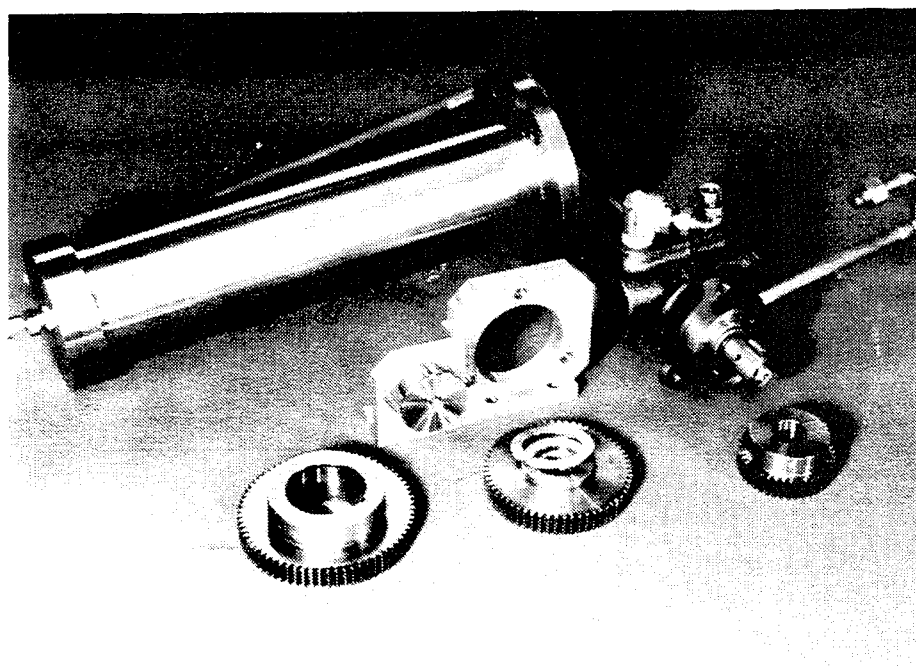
LUBRICATION SYSTEM COMPONENTS
